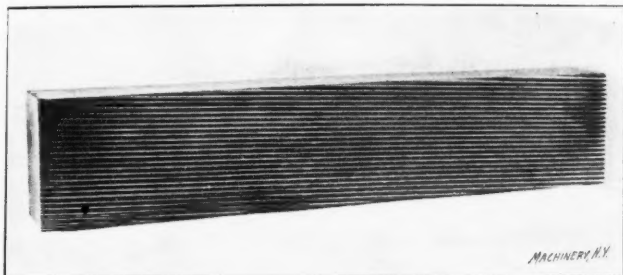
A Thread Rolling Die for Rolling United States Standard Threads
